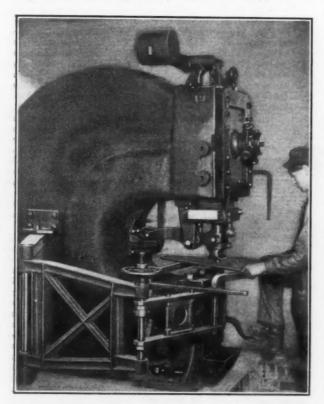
A Punch Equipped with the Woggle Table and Indicator, Made by the Standard Bridge Tool Company, Pittsburgh, Pa.
